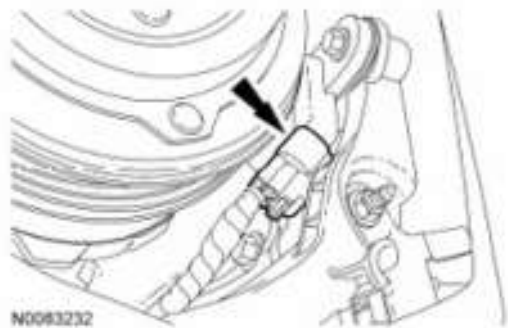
Locating Crankshaft Position (CKP) Sensor Electrical Connector
